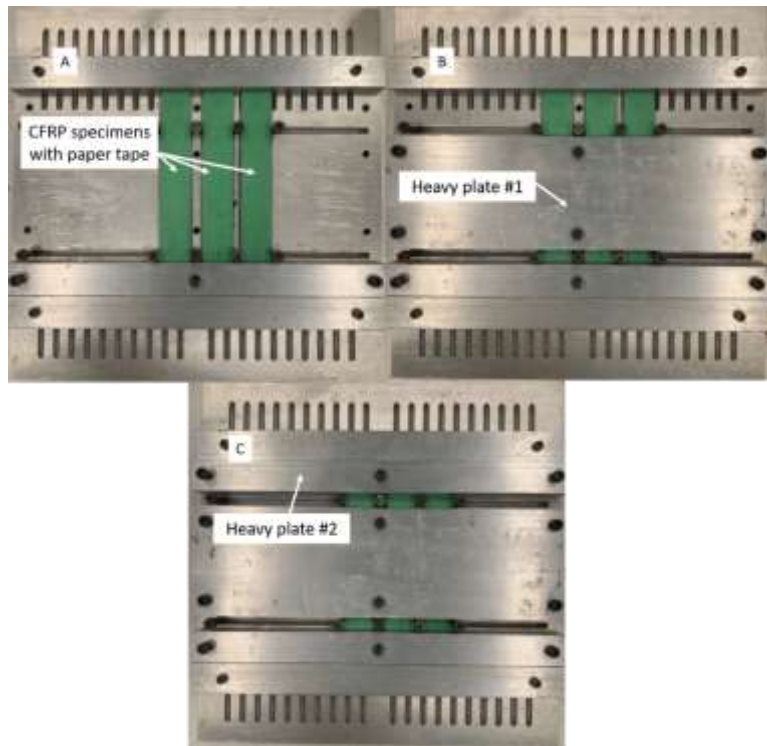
CFRP bonding steps with fixing mold without top plates (A), fixing plate on CFRP samples (B), and (C) fully fixed CFRP specimens.
